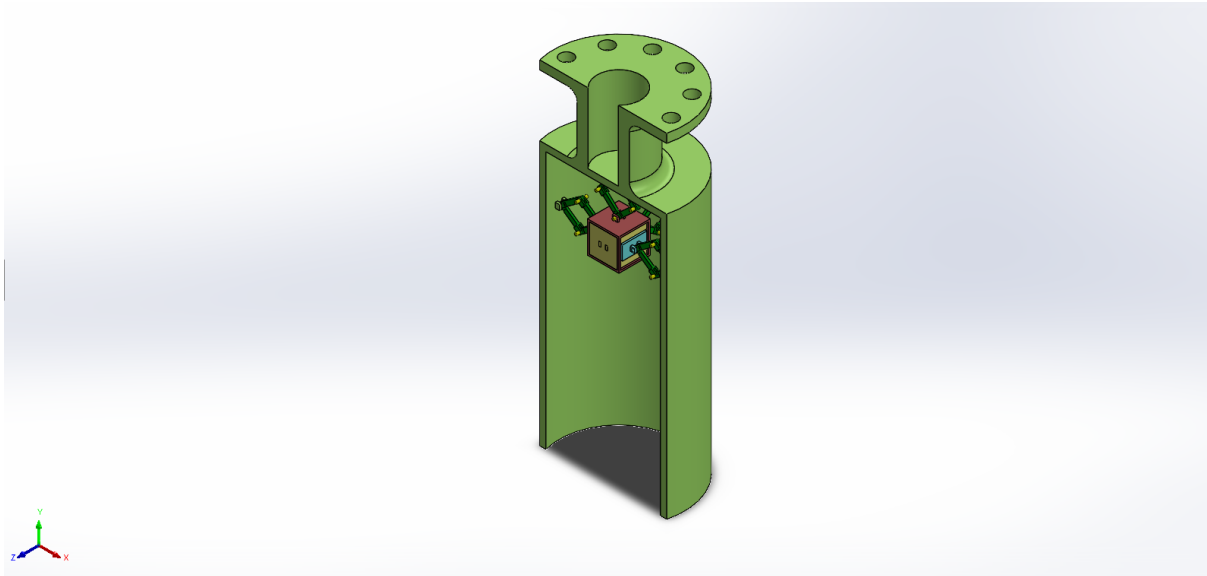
SOLIDWORKS cut view of Second Modified Mass.
